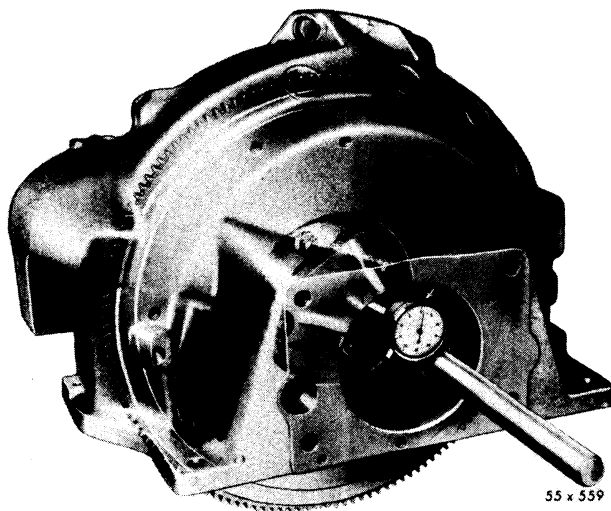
Typical Method of Attaching Fixture C-870 and Checking Clutch Housing Bore
